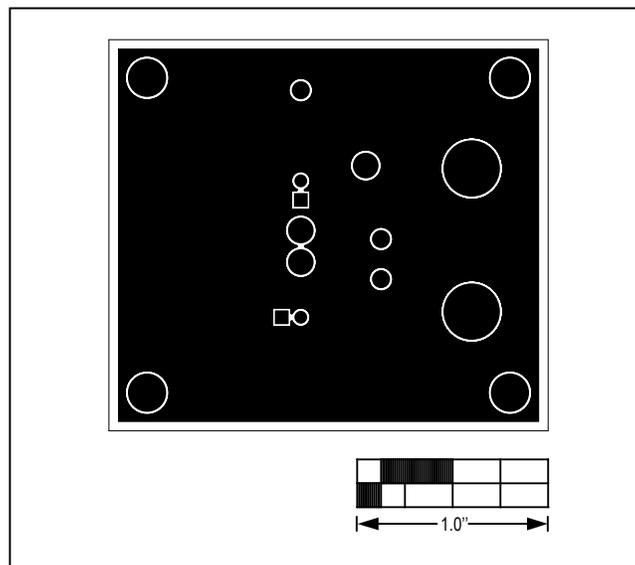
MAX14653–MAX14655 EV Kit PCB Layout—Solder Side
